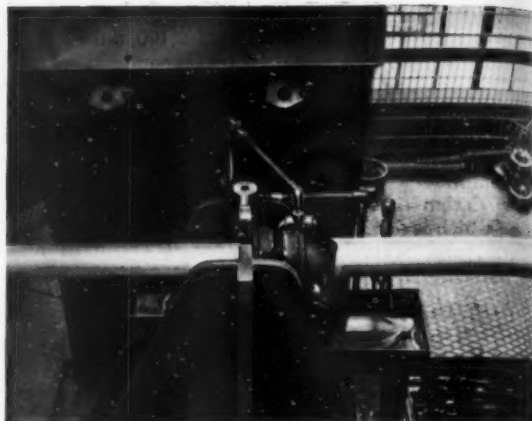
The tube being drawn through the sinking dies to form a cable sheath. Note the lubricating oil.
